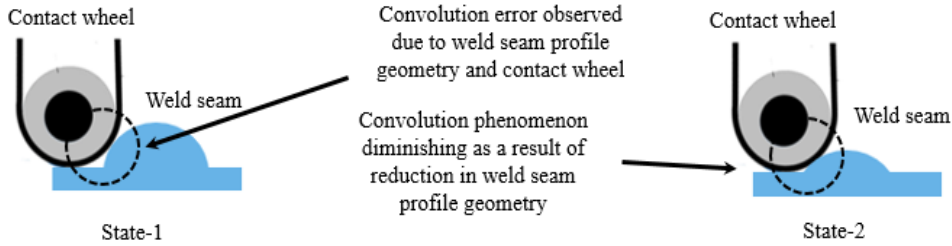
Comparison of the convolution error during machining weld seam in States-1 and 2 with the contact wheel.
